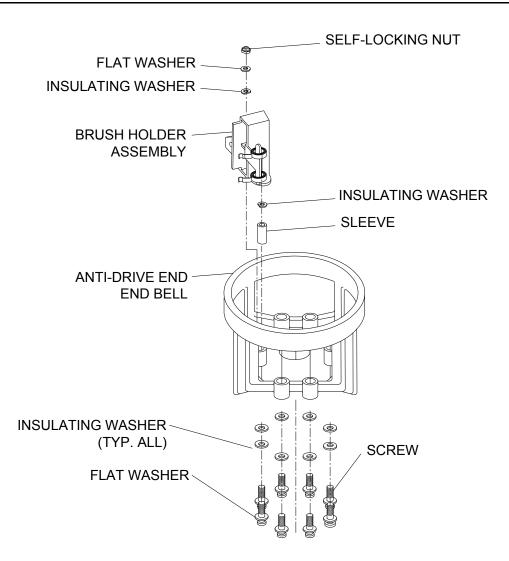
Removing Brush Holder Assemblies (Without Filter Board)
